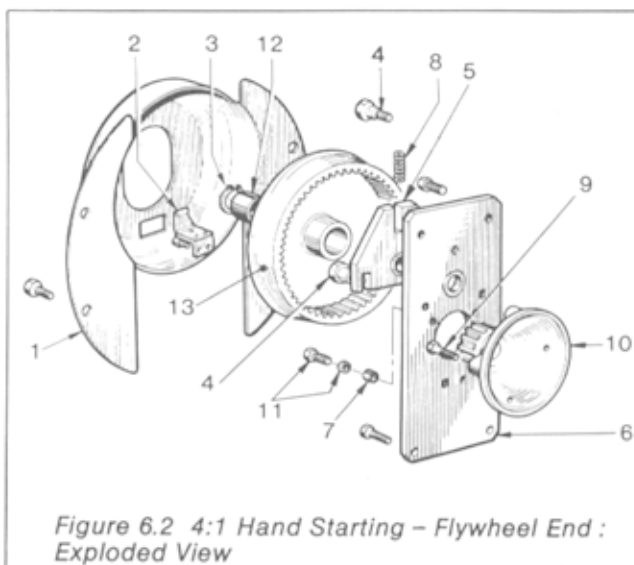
4:1 Hand Starting – Flywheel End : Exploded View
